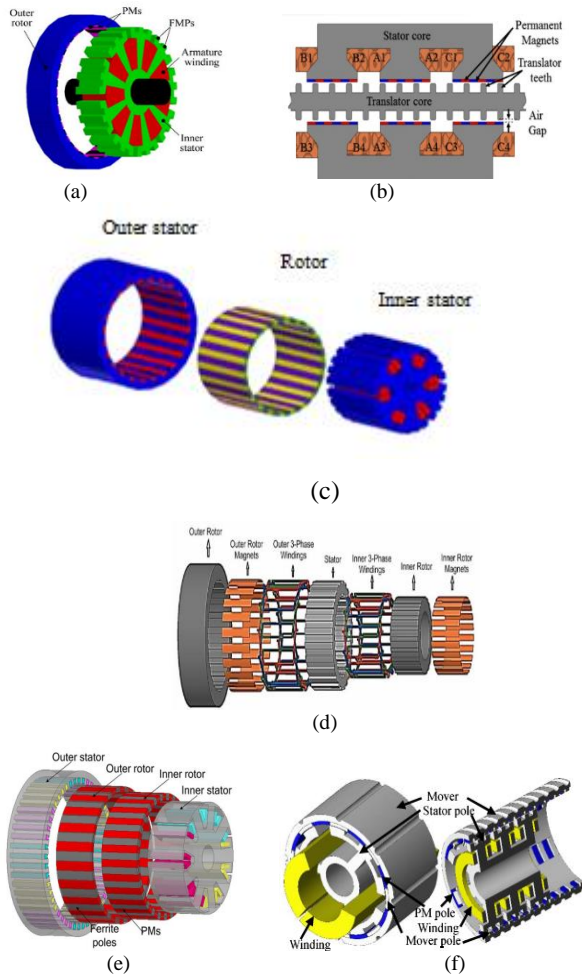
Structures of PMV machines a) SE-PMV machine [24] b) LPMV machine [25] c) DS-PMV machine d) DR-PMV machine [26] e) Double-Stator Double-Rotor PMV machine [27] f) DS- CORL PMV machine [28]
